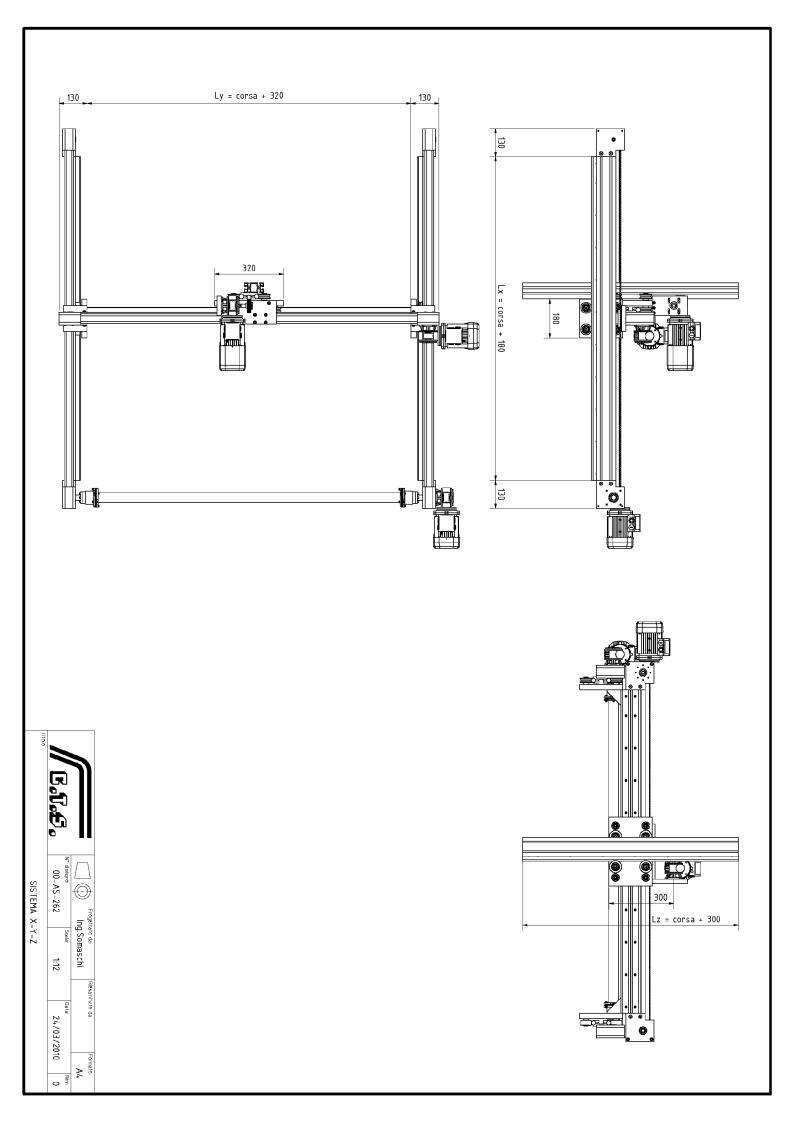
AS-262 MIDDLE-LIGHT VERSION WITH AD416 GUIDES
